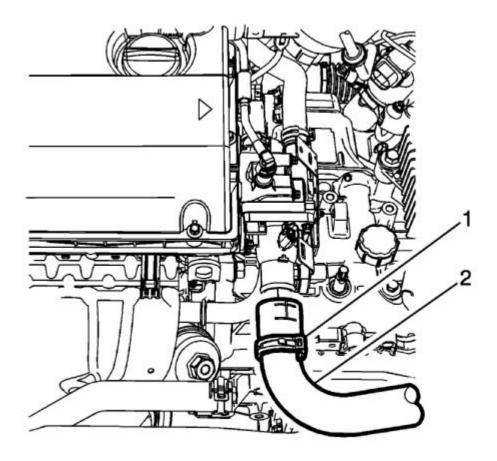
Radiator Air Inlet Hose & Clamp Courtesy of GENERAL MOTORS COMPANY
